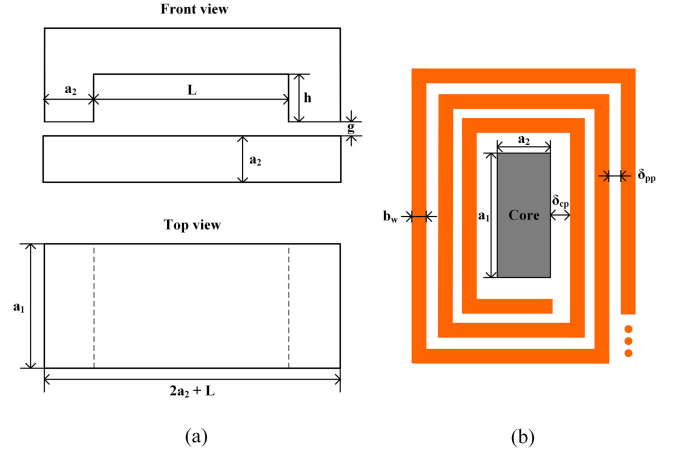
(a) U-I core sets geometry. (b) Cross-sectional view and winding geometry for each pillar.
